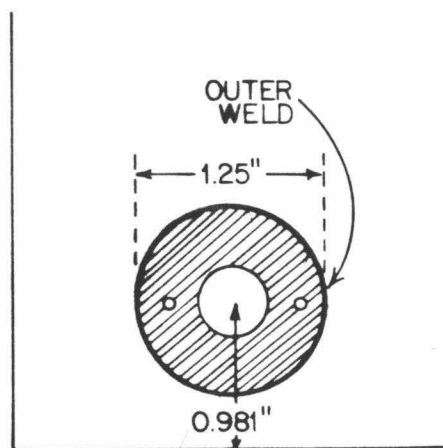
Shroud machining specifications: window housings. The housings are fitted onto the cannister and welded in place. Heavy lines indicate weld joints. Material: stainless steel.
